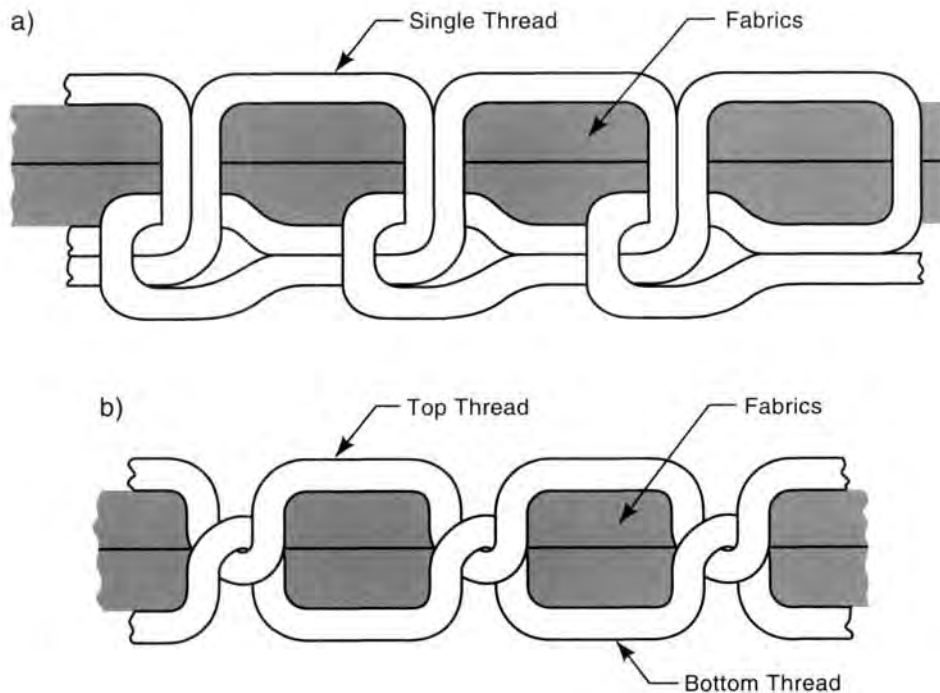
H4 Two common simple stitches: a) Chain stitch. One thread interlocks itself at the bottom of the fabrics being sewn. b) Lock stitch. The top thread interlocks the bottom thread. (Note: Stitches are shown very open to clearly illustrate how the threads interlock.)
